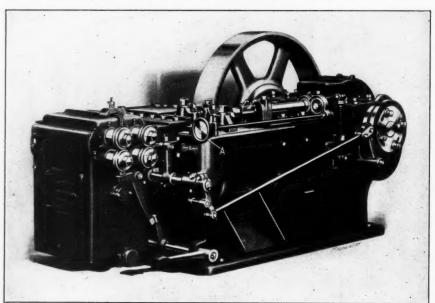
, National Continuous-motion Bolt and Rivet Making Machine equipped with Roll Feed and Adjustable Stop Gage
